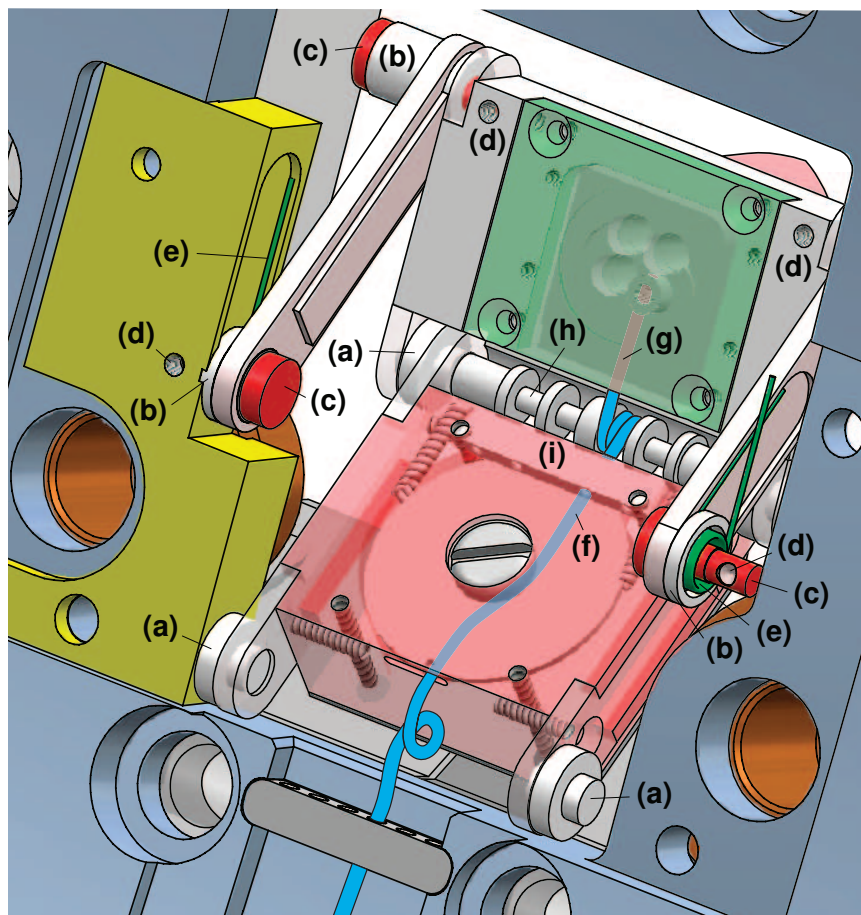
A back-view of the WASP: (a) ‘compound’ zirconia bushings, (b) alumina bushings, (c) shoulder bolts, (d) set screws, locking shoulder bolts against rotation, (e) return springs, (f) Teflon-coated electrode wire, (g) uncoated wire, terminating at the base of copper electrode contacts, secured by set screw, (h) alumina wire-support axle, and (i) alumina heat sink. Not shown for clarity: RHS mounting piece, three additional electrode wires and copper contacts, coil wires, limit springs, and small hardware.
